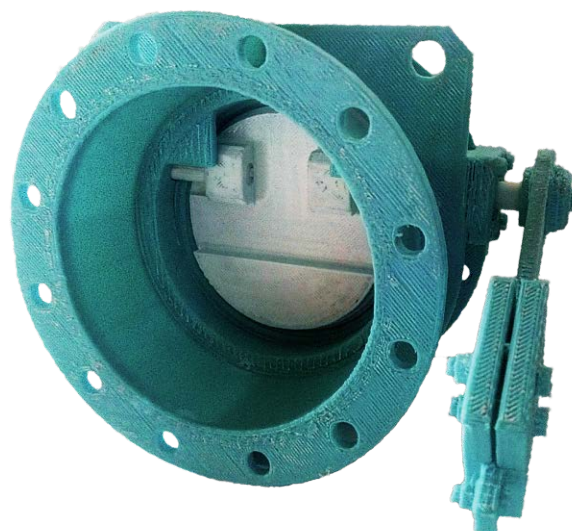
Reduced-scale 3D model of the swing check valve with lever and weight made on a low-budget 3D printer *MakerBot Replicator 2X
